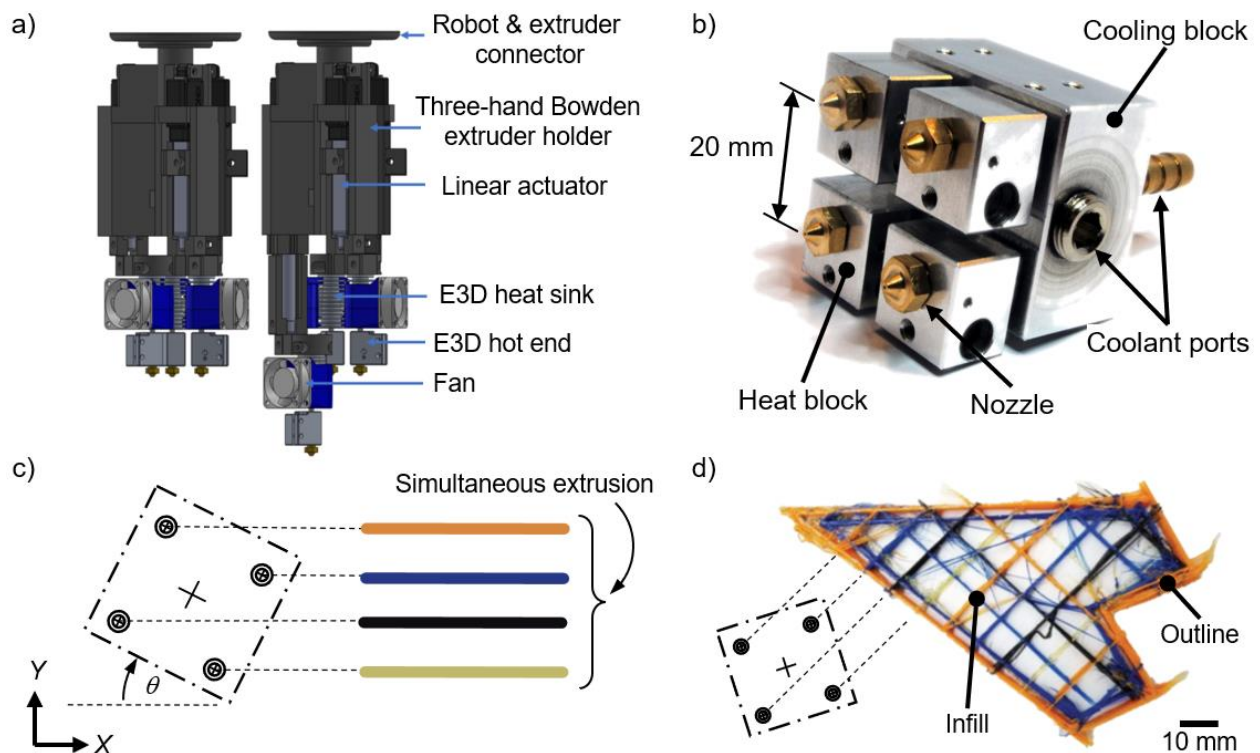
FFF technique using more than one extrusion nozzle. a) Three-nozzle system for multi-resolution FFF on 6-axis robot. Adapted from [102]. b) E3D Kraken printhead for extrusion of up to four thermoplastic filaments. Adapted from [117]. c) Printhead rotation around the Z axis
